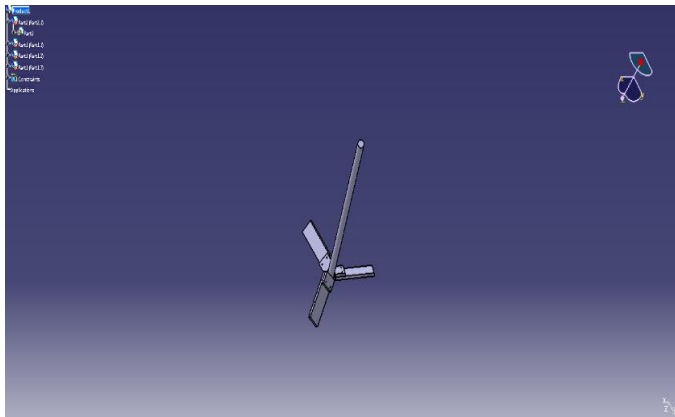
Geometry of agitator impeller shaft and blade in Ansys 14.0
